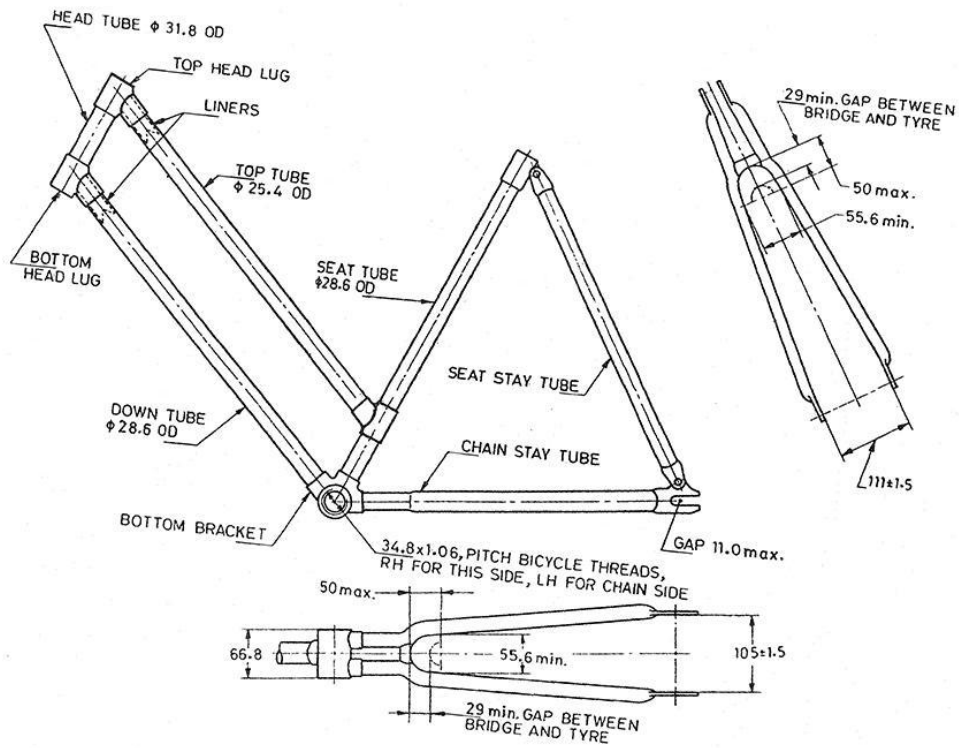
Basic parallel bars bicycle frame. All dimensions in millimeters.
